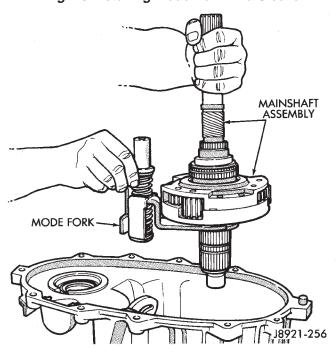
Assembled Mainshaft And Mode Fork Installation
